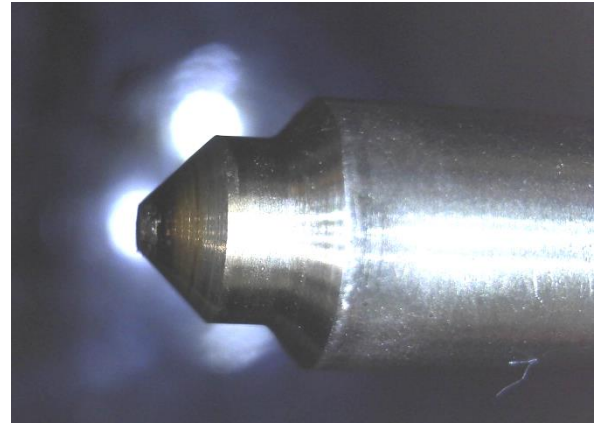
Zoom up view of the hollow piston valve (After LSD trial)
